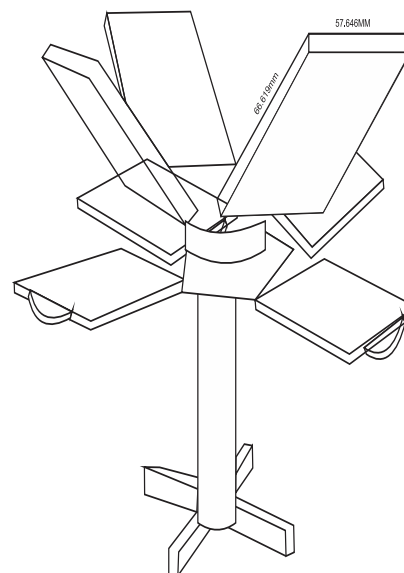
Sample of Finished Screen-printing Machine Fig. 2.-3Dimensional rendering of sketch
